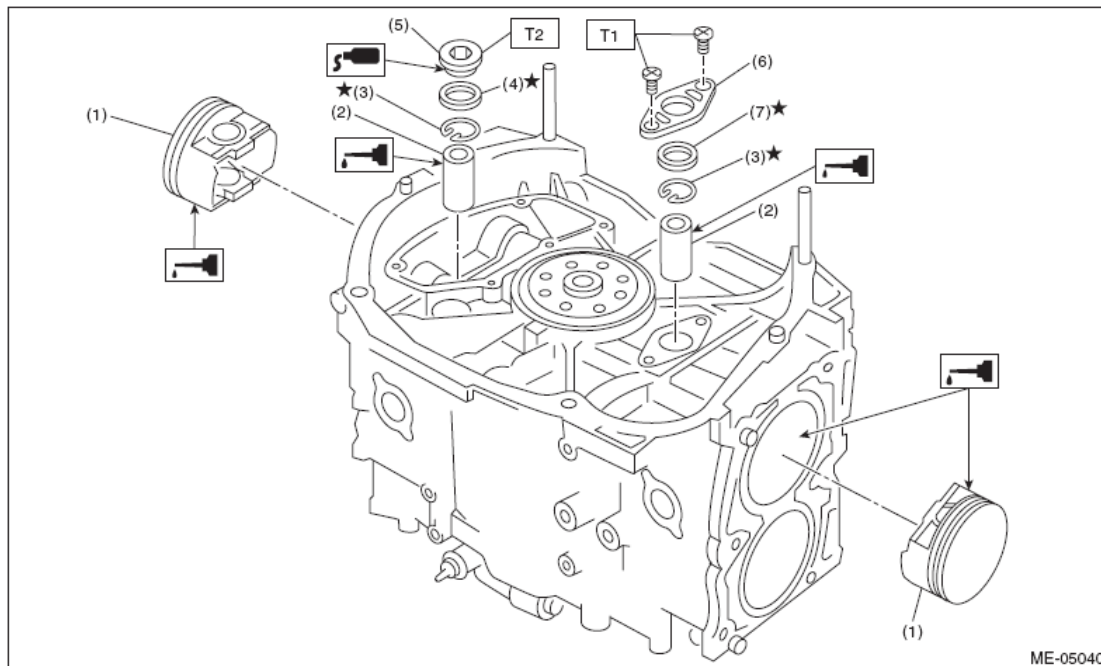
Removing/Installing Service Hole Plugs Using Hexagon Wrench
